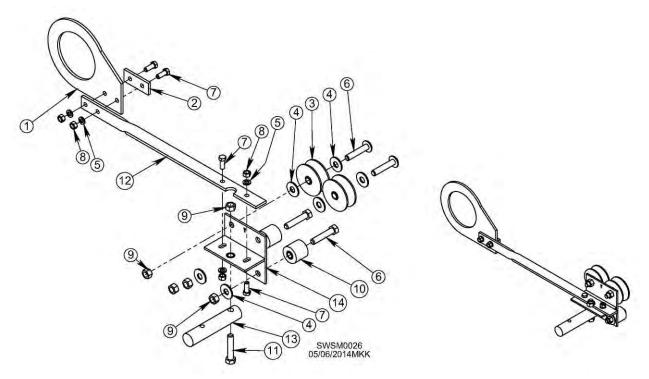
& Table 9 – Exploded view & parts list for stabilizer kit trolley pivot assembly
